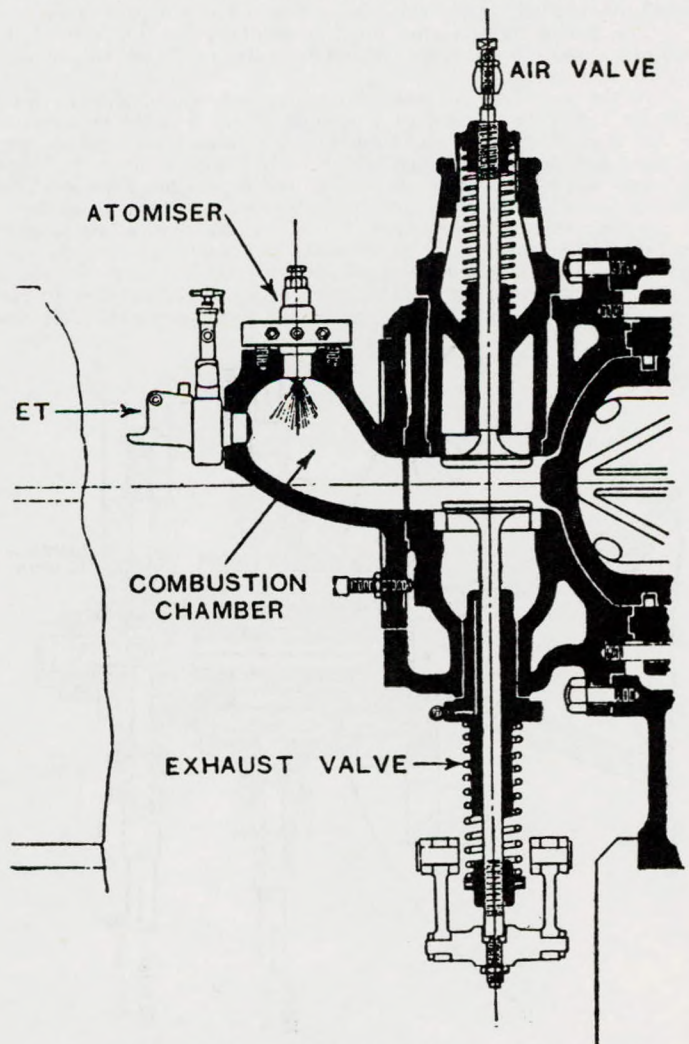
Section of Ruston "O" type engine combustion chamber.
